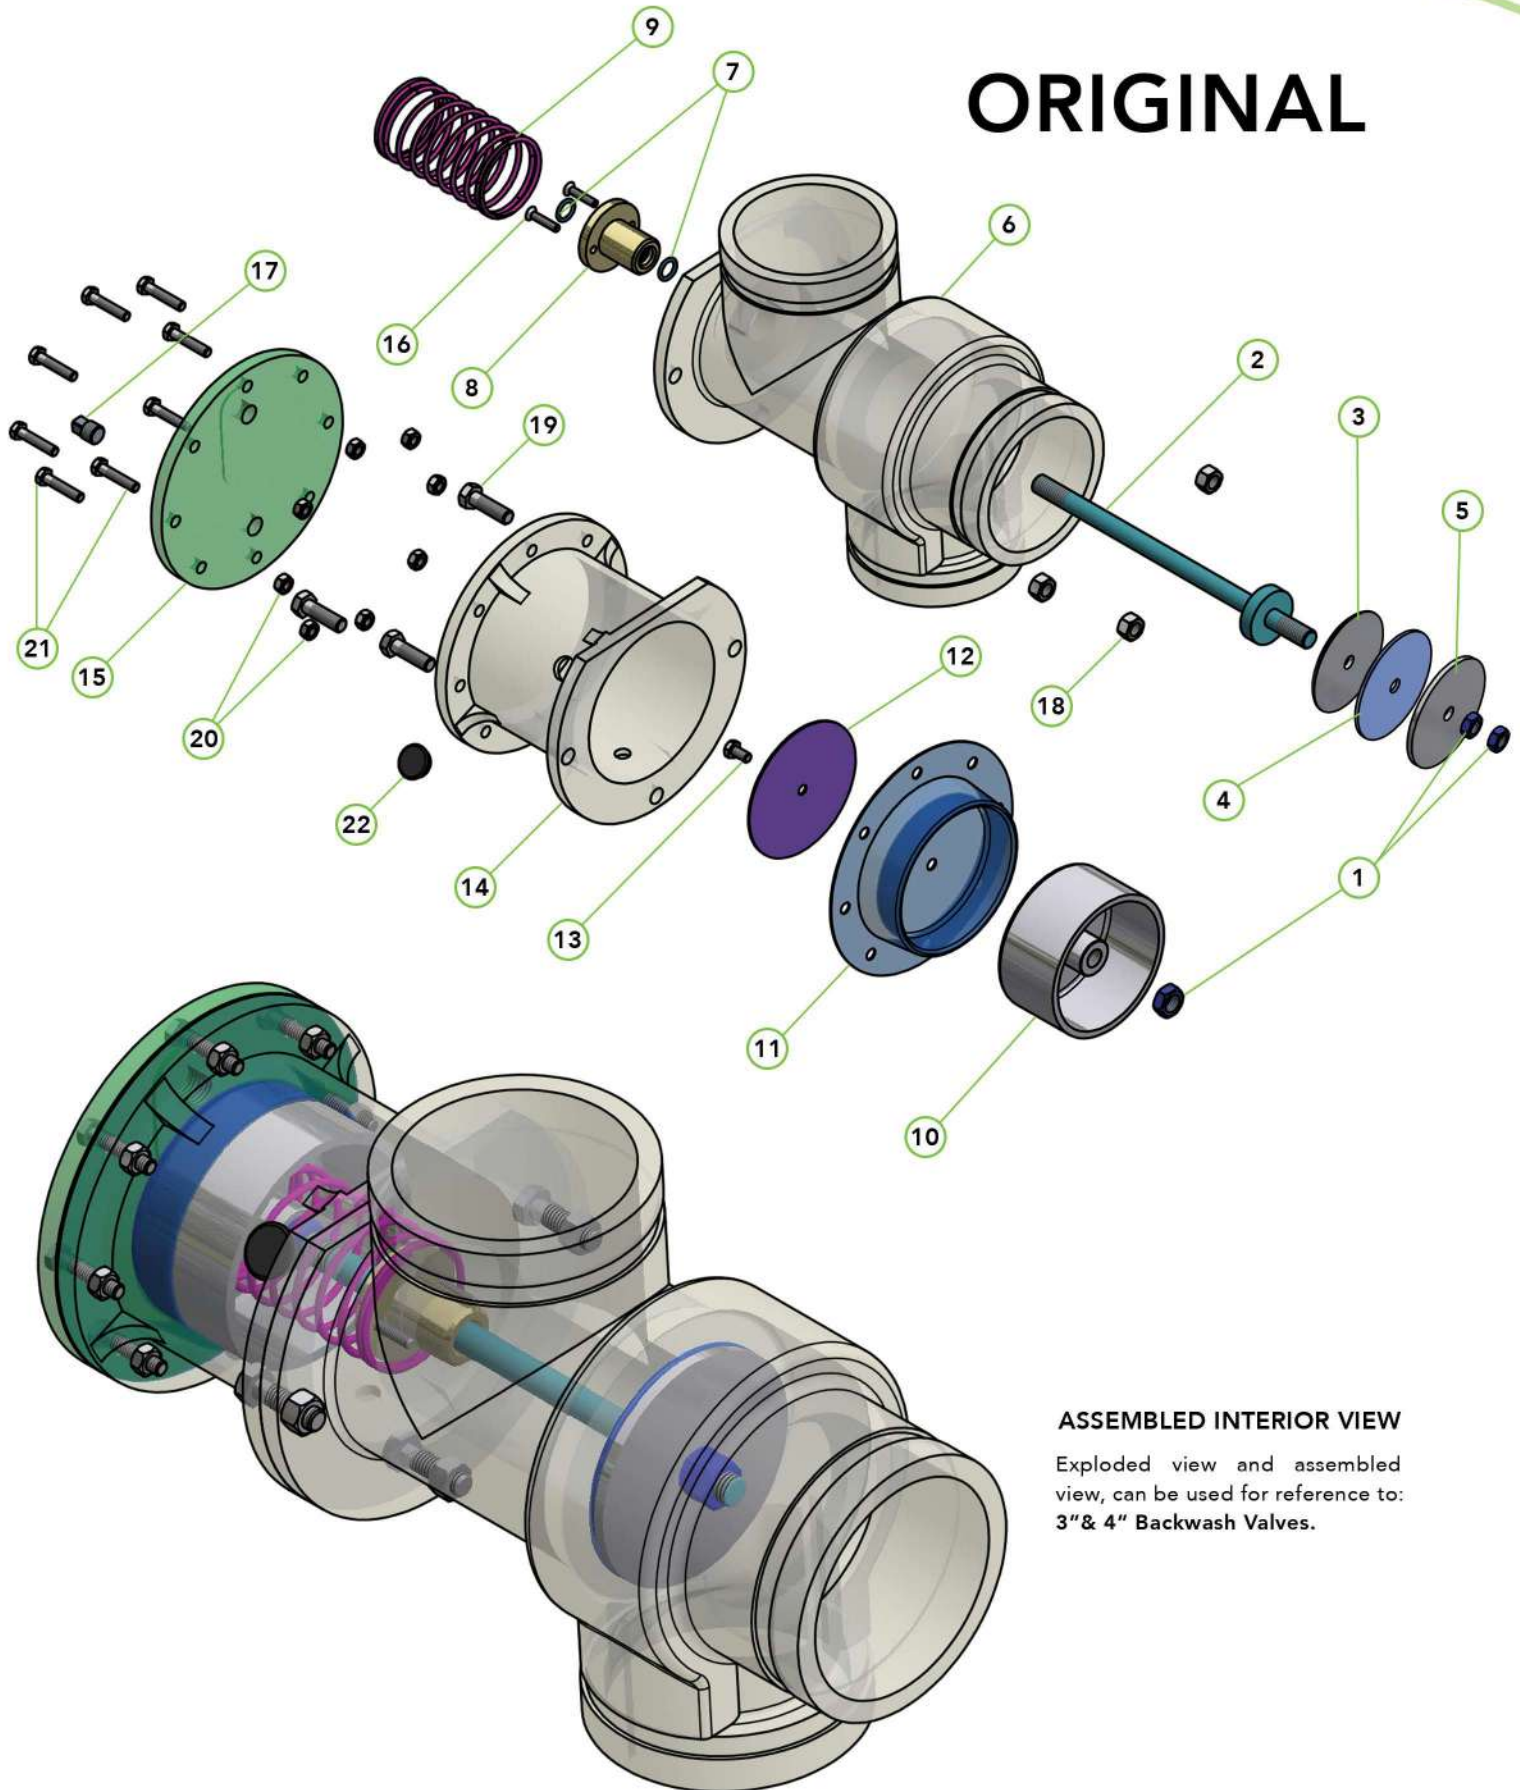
BACKWASH VALVE EXPLODED VIEW
